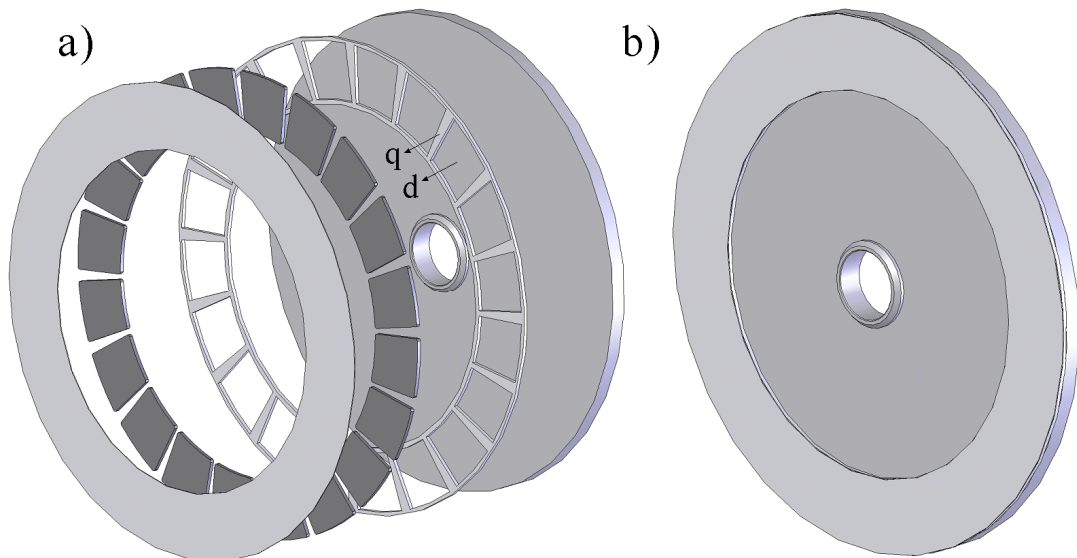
Rotor construction of AFPMSG2. Magnets are surrounded by an aluminium installation jig, which is installed on a cast iron rotor body. An aluminium surface plate is installed over the magnets. a) Exploded view. b) Assembled rotor.
